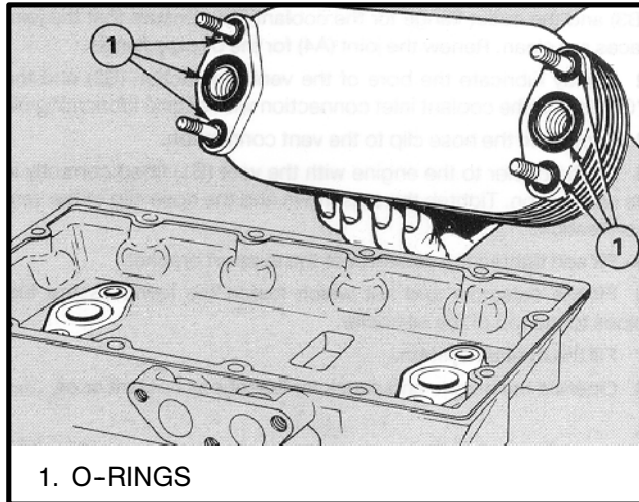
JOINTS FOR THE COOLER ELEMENT
